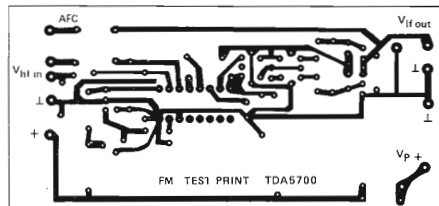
Track side of printed-circuit board; (test circuit Fig. 6).
